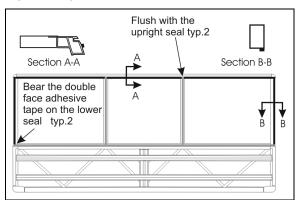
FACE FIXED WINDOWS - 3/16 X 1/2 DOUBLE FACE ADHESIVE TAPE INSTALLATION
